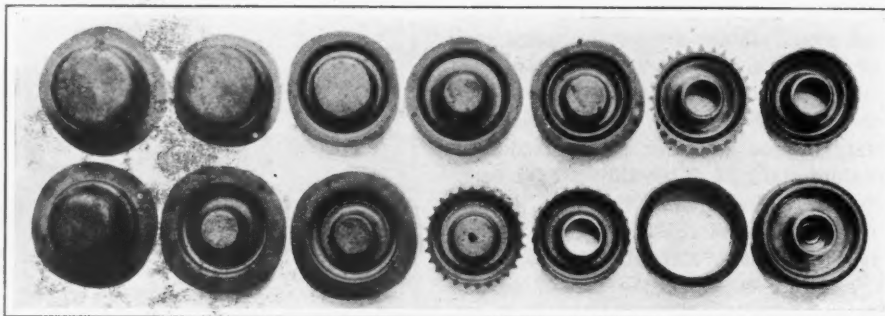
Various Blanking, Drawing, and Forming Operations on Wheel Sections
